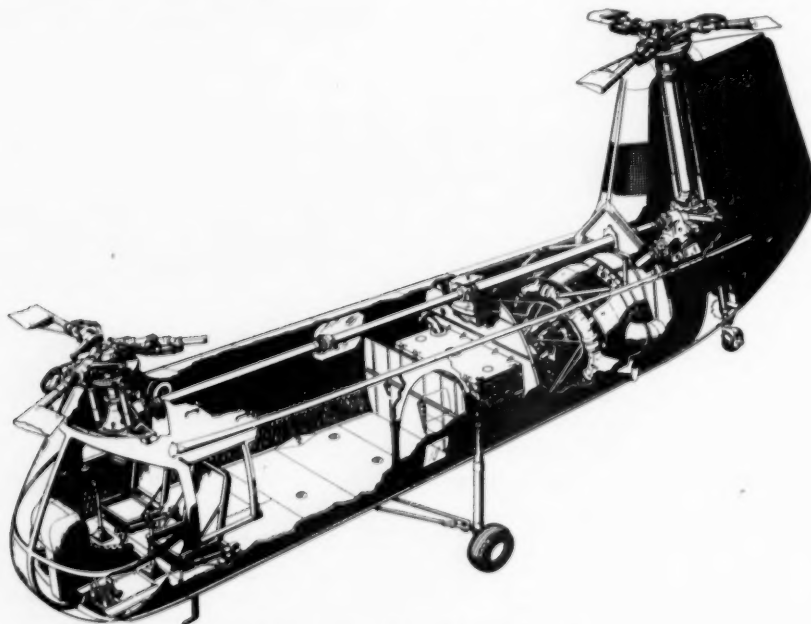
CUTAWAY VIEW SHOWING HUP DRIVE SYSTEM
